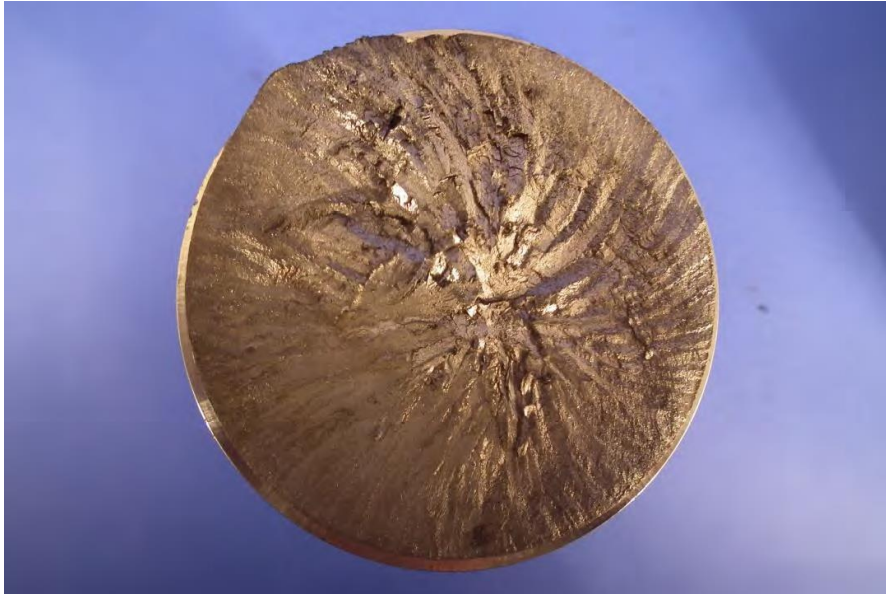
NDE (Non-Drive End) shaft fracture face
